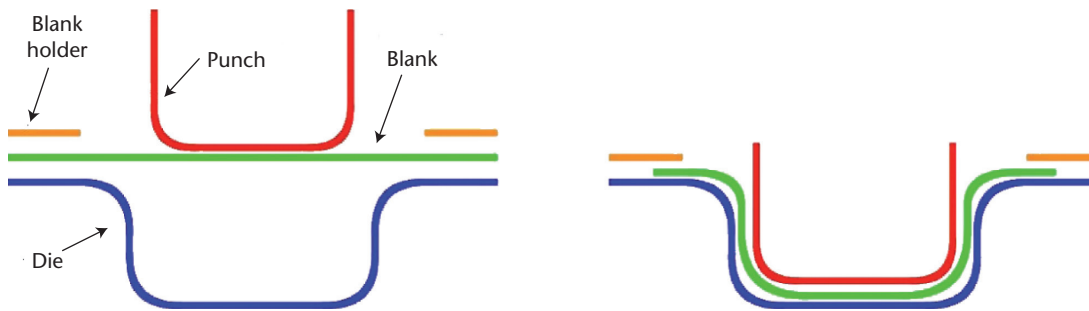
Example application: the deep drawing process for deforming metal sheets. The image shows a cross section of tools (die, punch, and blank holder) and the workpiece (blank) at the beginning (left) and end (right) of a deep drawing process.
